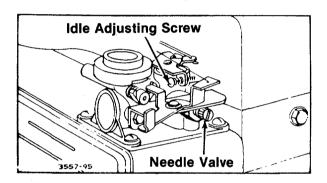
CARBURETOR ADJUSTMENT Final Adjustment:
